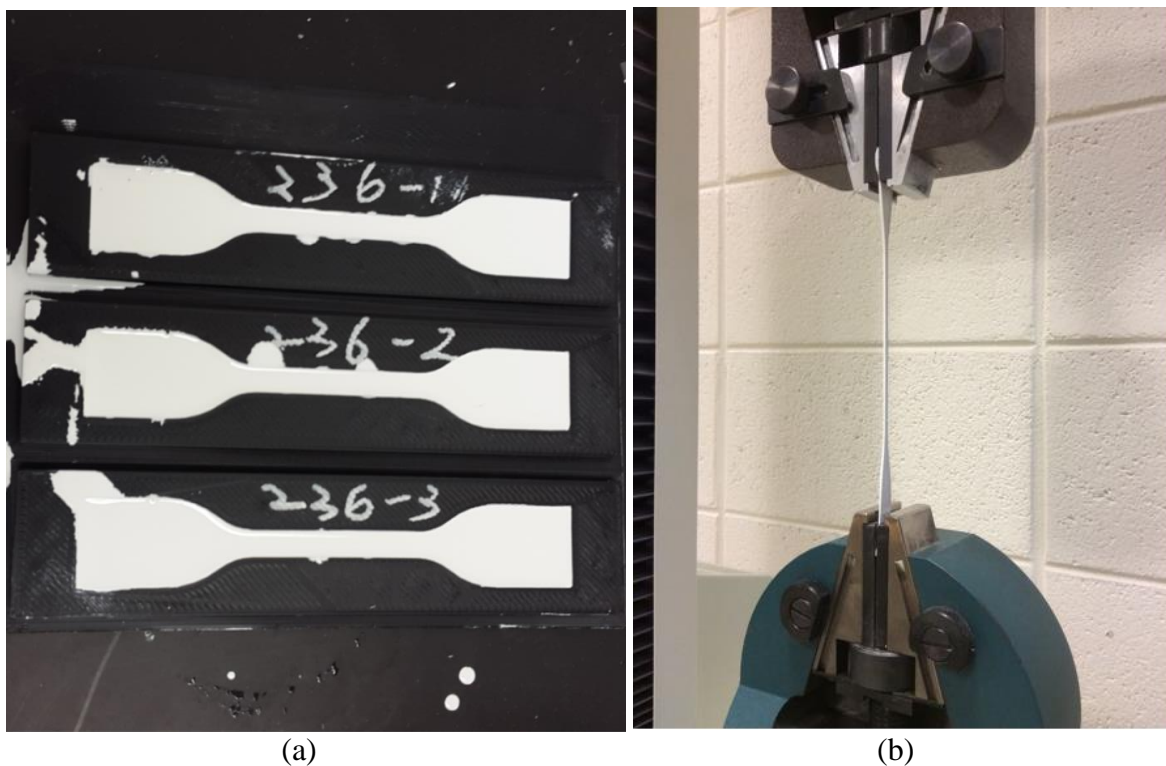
(a) An example of molding 236 silicone elastomer (b) 236 silicone dumbbell specimen being tensile tested
